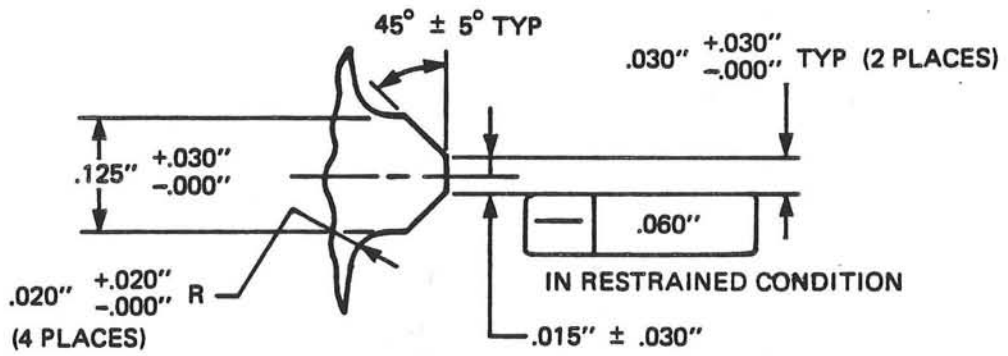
WELD DEPOSIT SURFACE CONDITION
